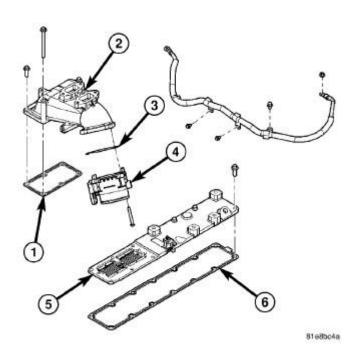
Intake Air Heater Assembly Courtesy of CHRYSLER GROUP, LLC
